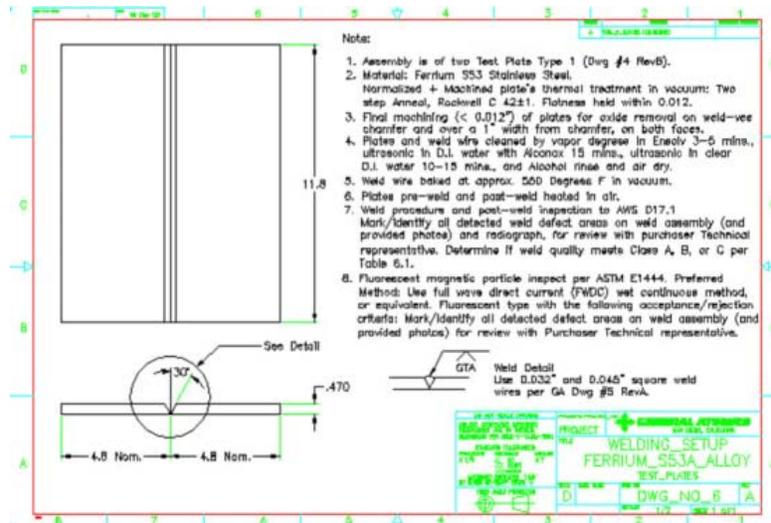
Design drawing (including weld specification and inspection) for GTA welding of two Test Plates.
